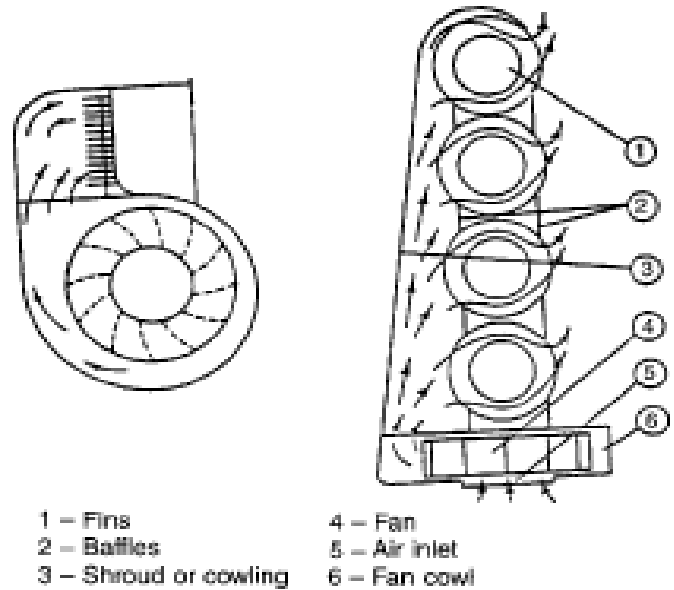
Simple in-line air-cooled engine using radial-type fan.
